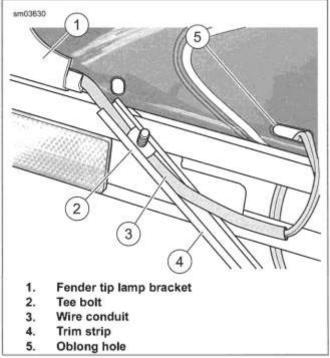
Install Conduit in Trim Strip COMPLETE
